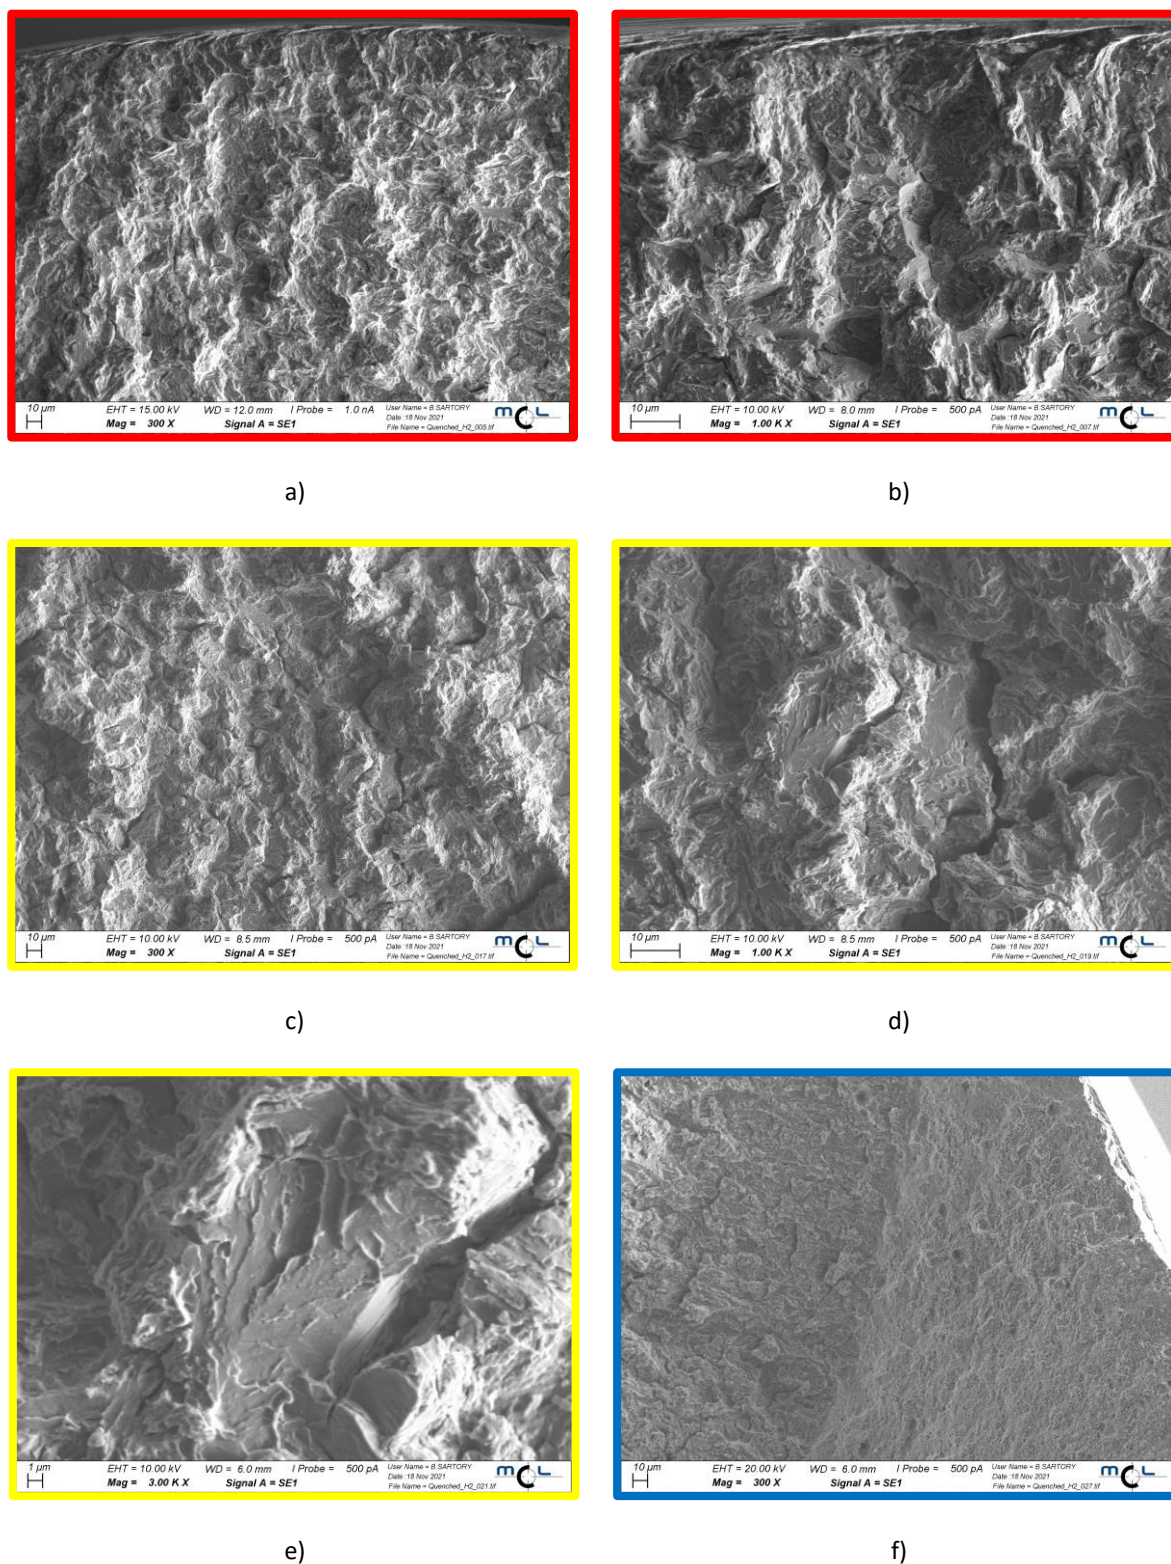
Fracture surface from quenched steel, in a) the origin of the fracture at a magnification of 300x, in b) a detail of the fracture origin at a magnification of 1000x, in c) the hydrogen fracture at 300x, d) & e) shows a detail of the hydrogen fracture with so river patterns at 1000x and 3000x, f) shows the transition zone between hydrogen fracture (left) and ductile forced fracture (right), 300x
